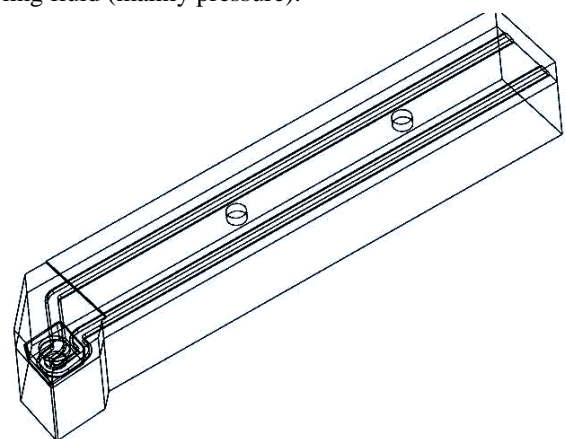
Internally cooled tool with cooling channels built into the tool holder
